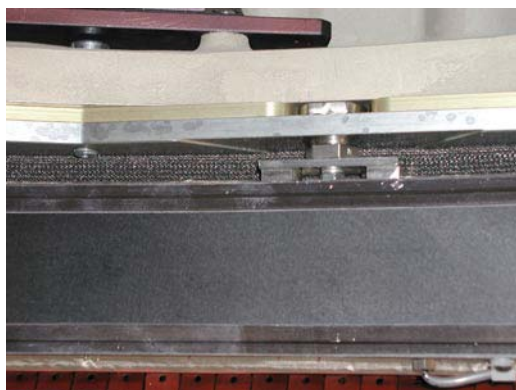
Center detector mounting bolt (edge view of assembly)
